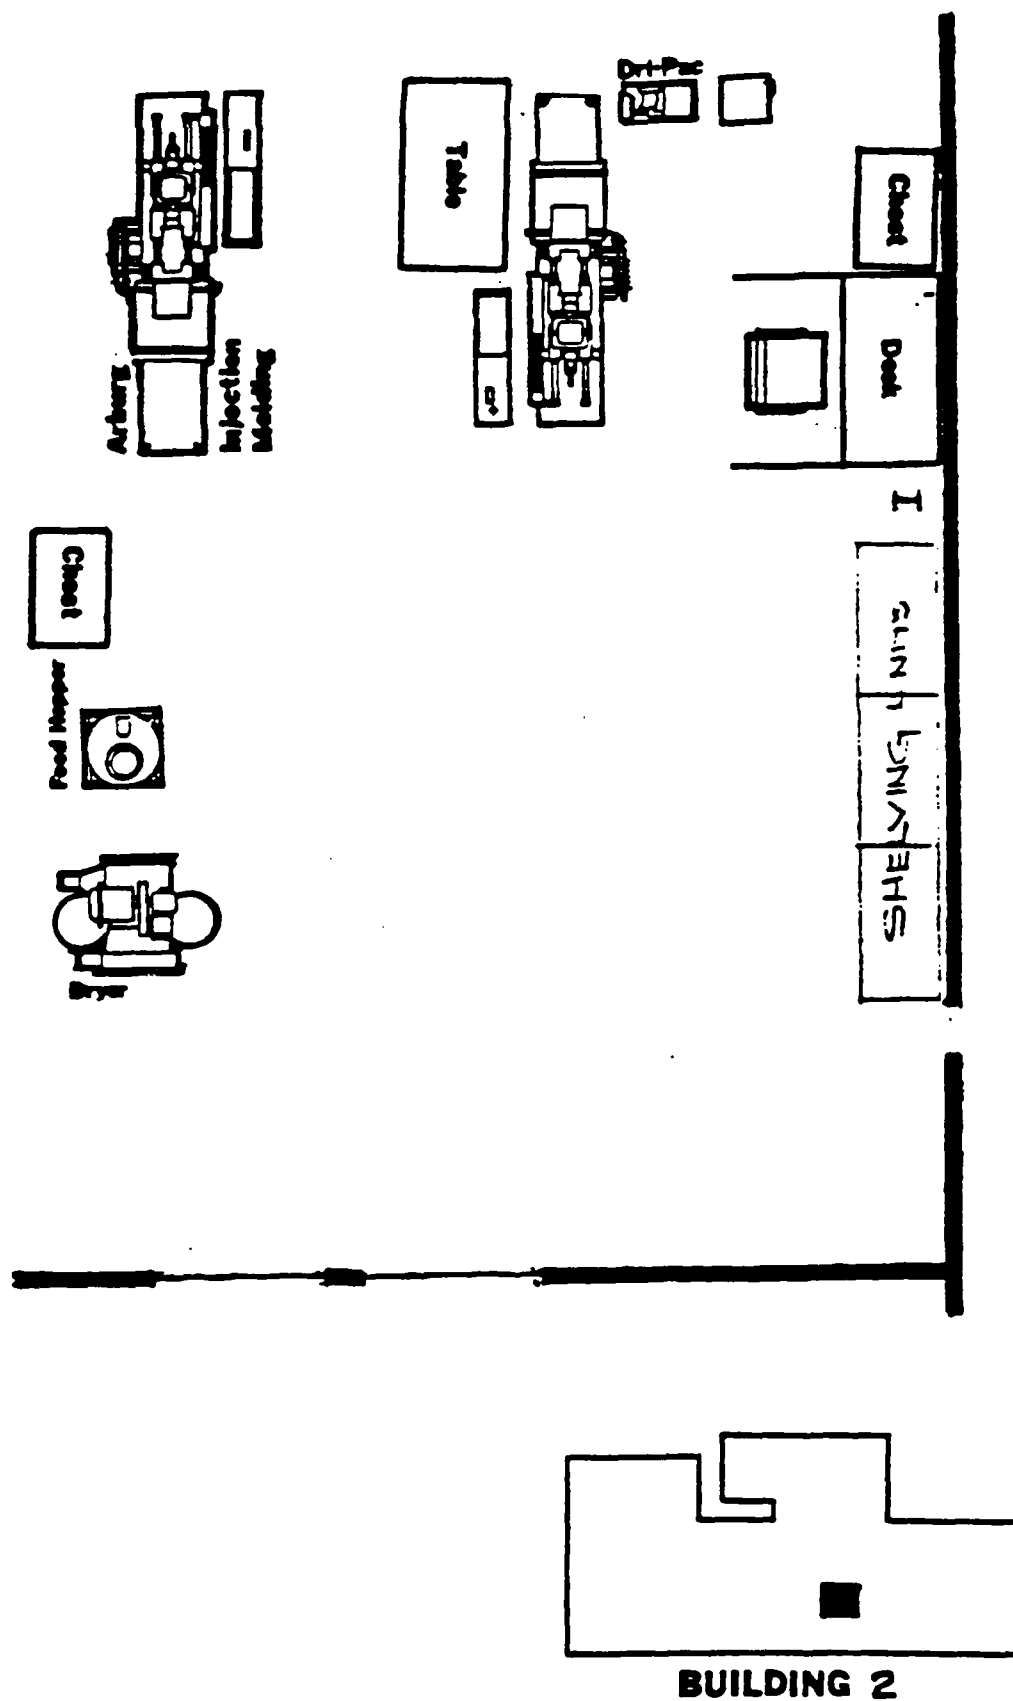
IMPROVED MOLD SHOP LAYOUT
